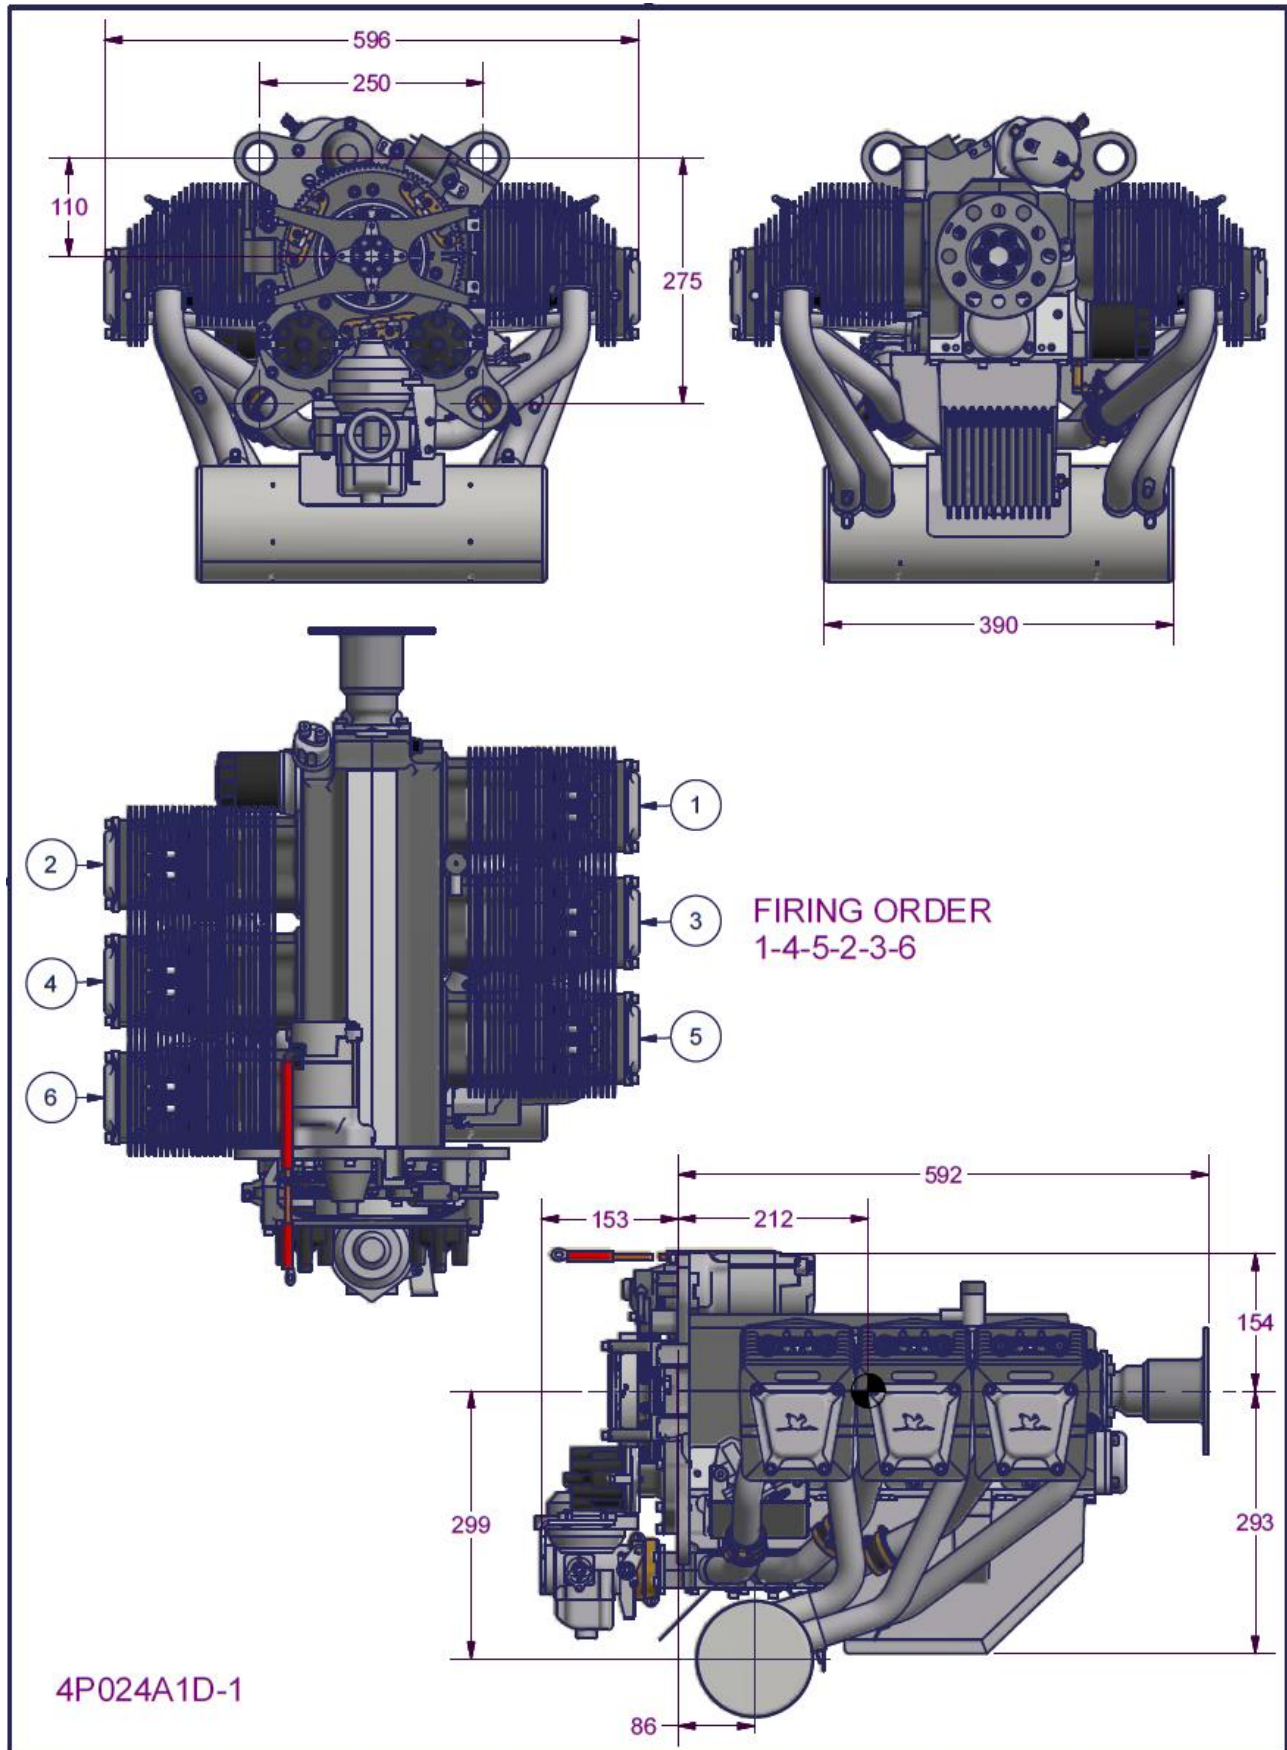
3300 Gen 4 Engine dimensions and layout
